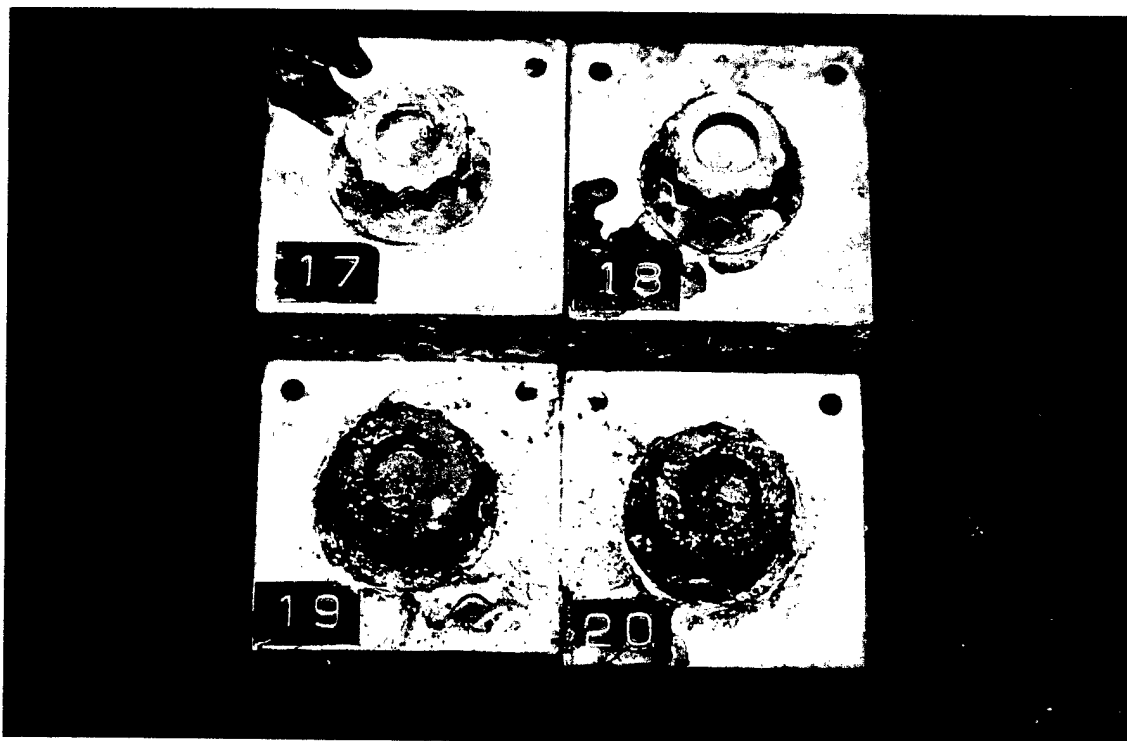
H11 Chromium Hot Work Tool Steel Bolt Heads With IVD Al Coating After 62 Days of Salt Spray. Reduced 25%.
